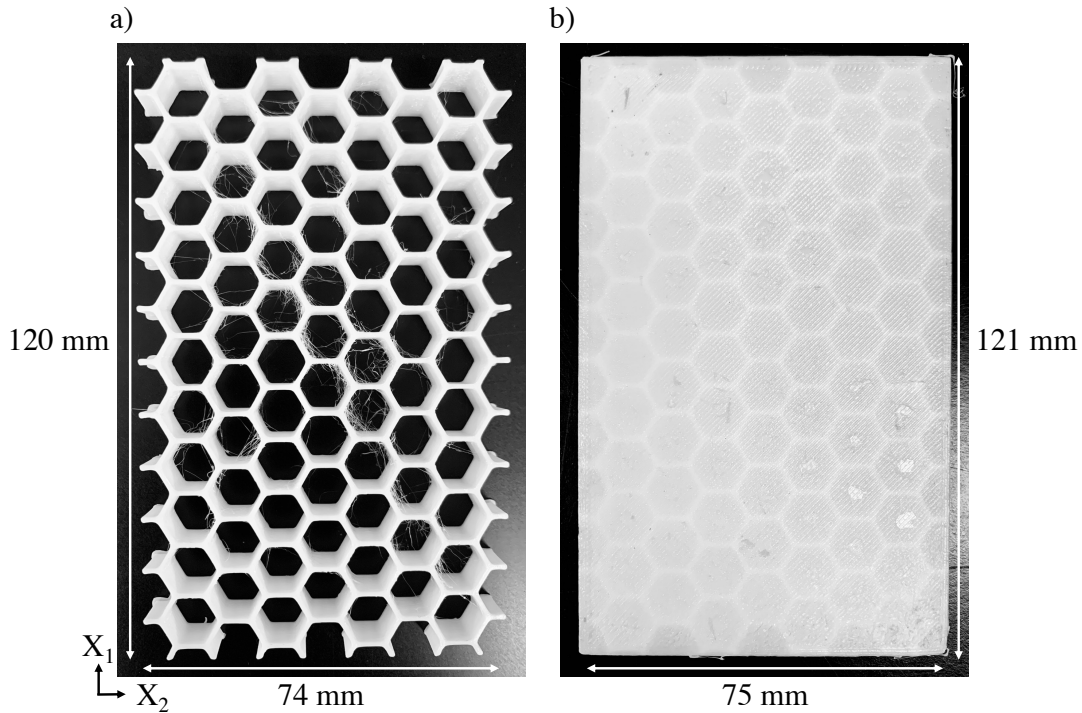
3D-Printed Honeycomb Samples for Shear Testing
